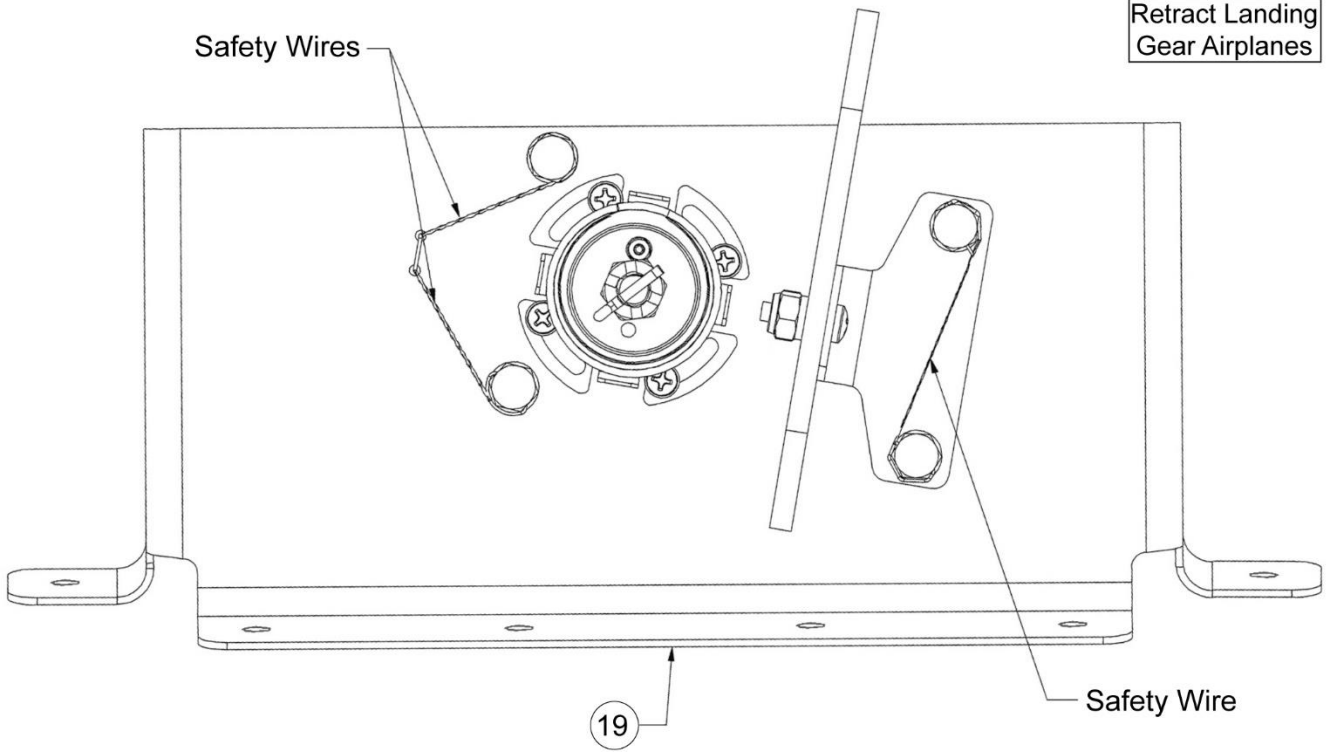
Example of Safety Wiring Pitch Servo Bolts
